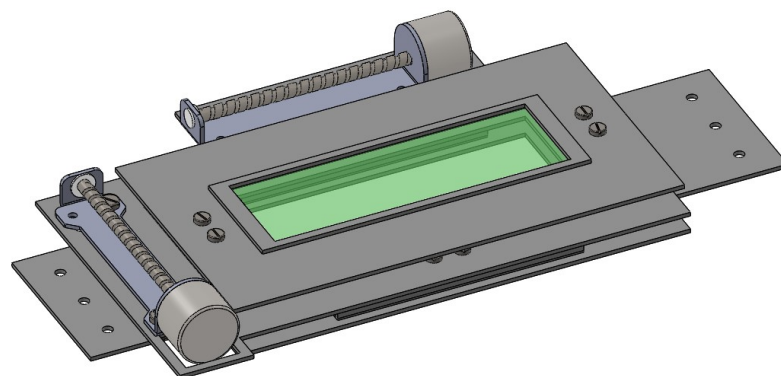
CAD design of microscope slide stage based on being manufactured out of 1mm steel plates
